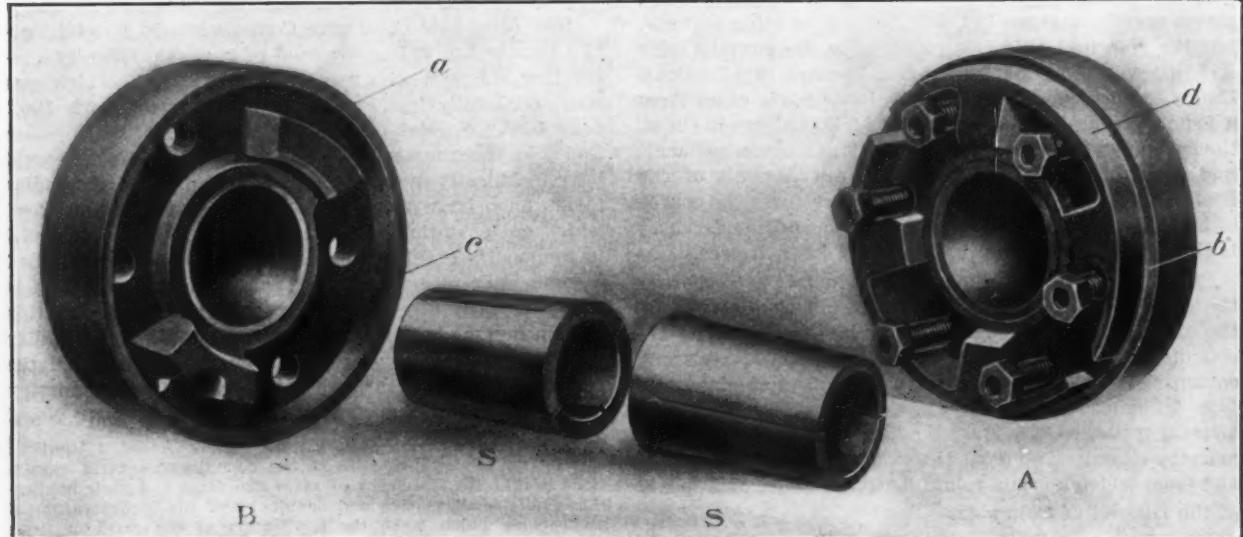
The Separated Parts of the Hendershot Shaft Coupling, Sold by Manning, Maxwell & Moore, Inc., New York.
